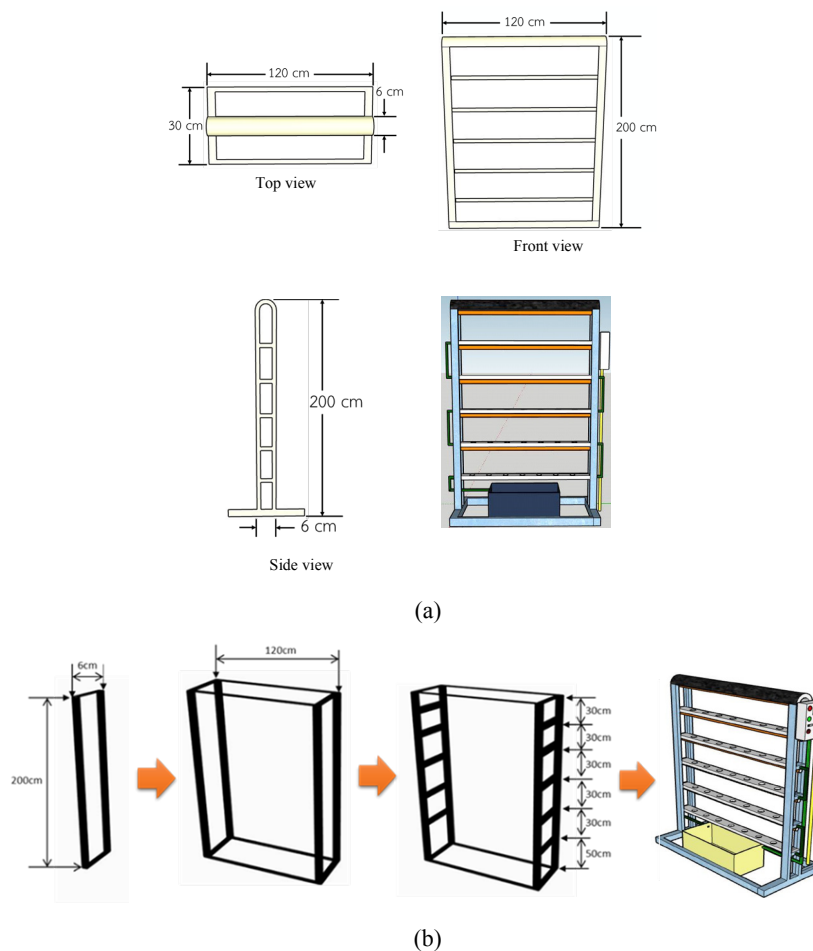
(a) Dimensions of vertical hydroponics system (b) Step of assembling the workpiece
